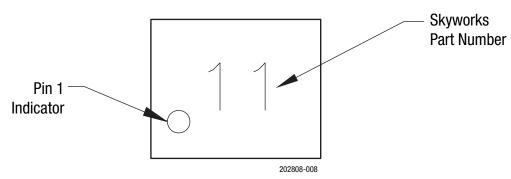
SKY65611-11 Typical Part Marking (Top View)
